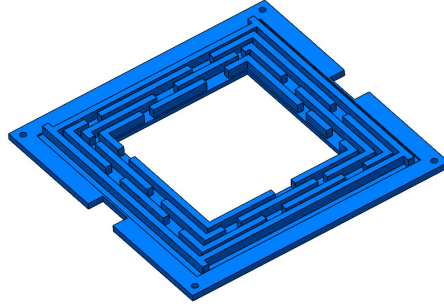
Custom designed labyrinth seal, inspired by the one used in [23]
